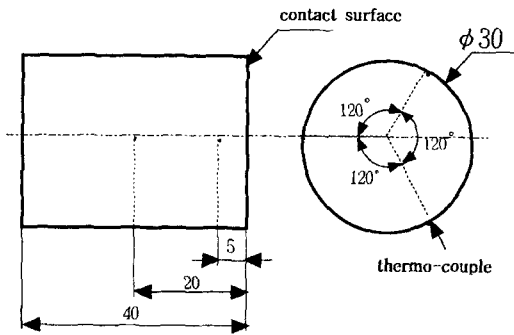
Details of a specimen and measuring positions of termocouples on the wall.
